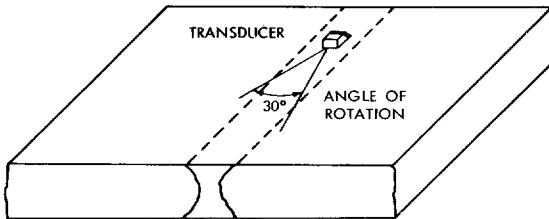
SUPPLEMENTARY TECHNIQUE FOR INSPECTING BUTT WELDS WHEN THE WELD BEAD IS GROUND FLUSH
